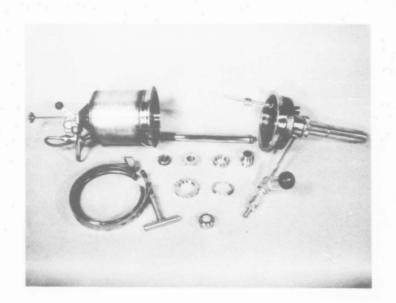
ASSEMBLED AND DISASSEMBLED VIEWS OF COMPRESSOR
